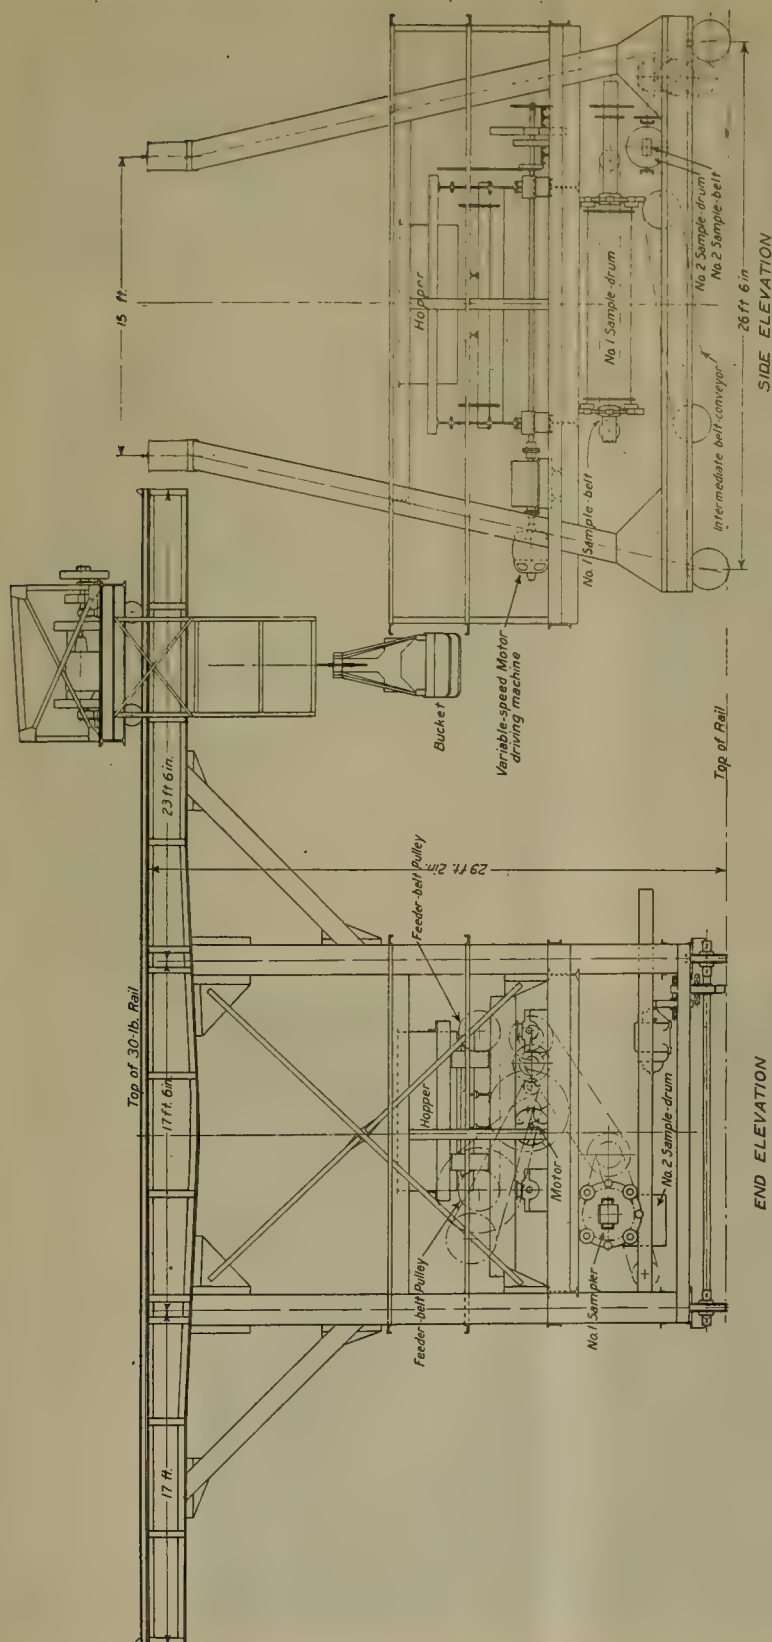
GENERAL DRAWING OF MARTIN MACHINE
